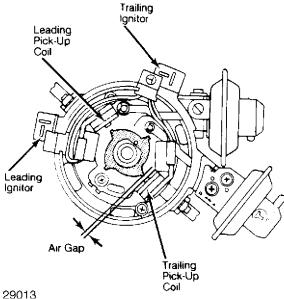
Adjusting Distributor Air Gap Check air gap at all teeth and both pick-up coils.
